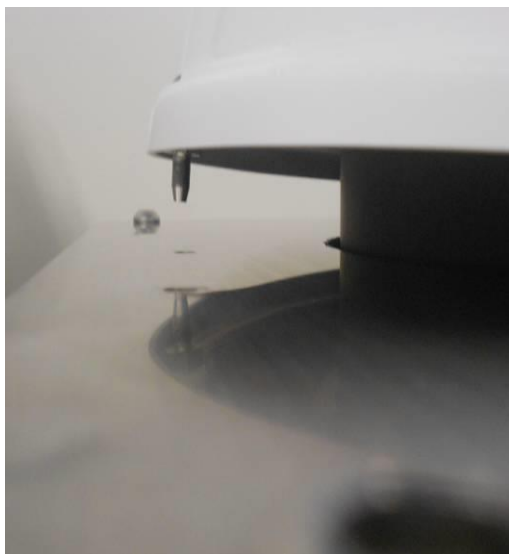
The safety cover showing the locating pin, and side cover removed.
